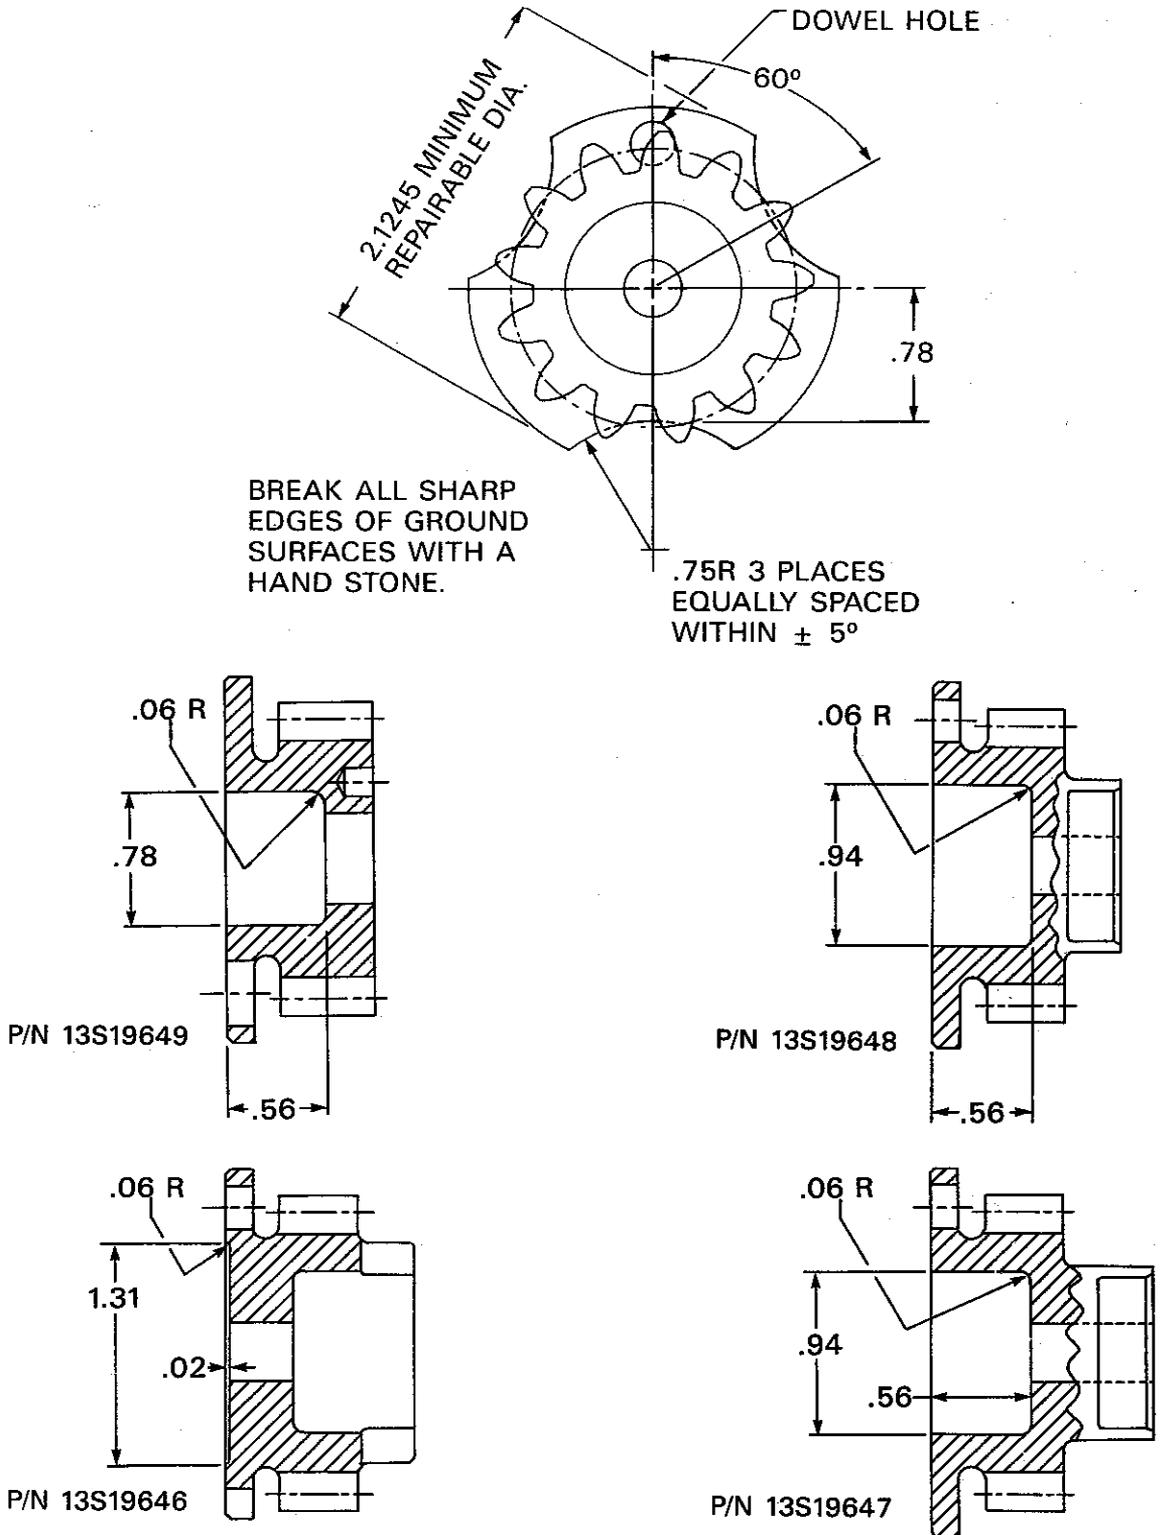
E. Details for Rework of Crankshaft Gears to Current Configuration
